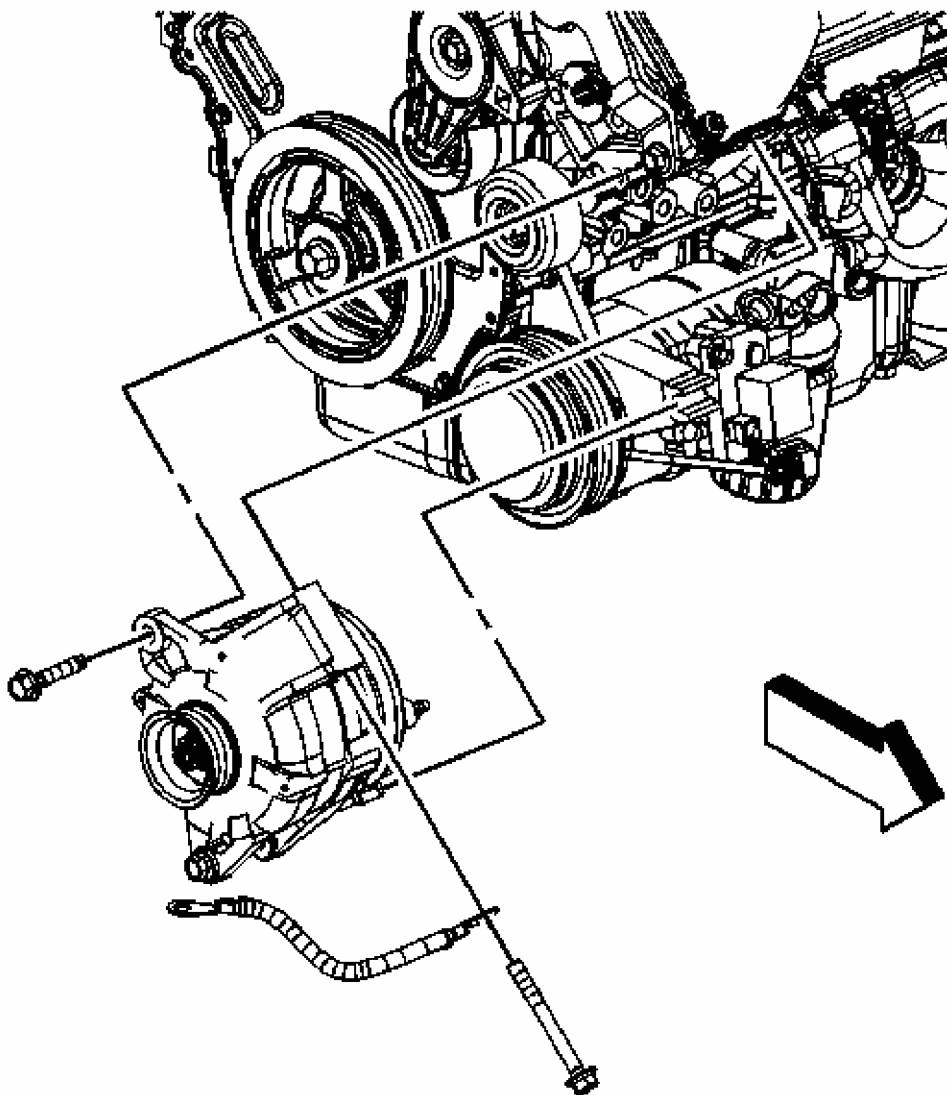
Identifying Rear Generator Bolt & Ground Cable
